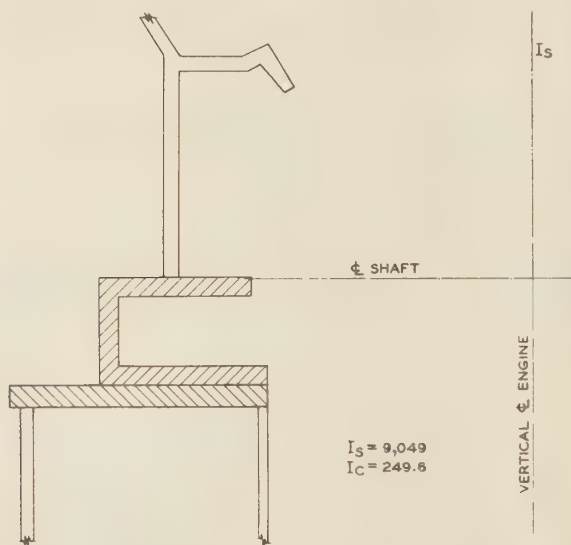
, FRAME SECTION OF THE LOCOMOTIVE-TYPE ENGINE SHOWN IN FIG. 10
